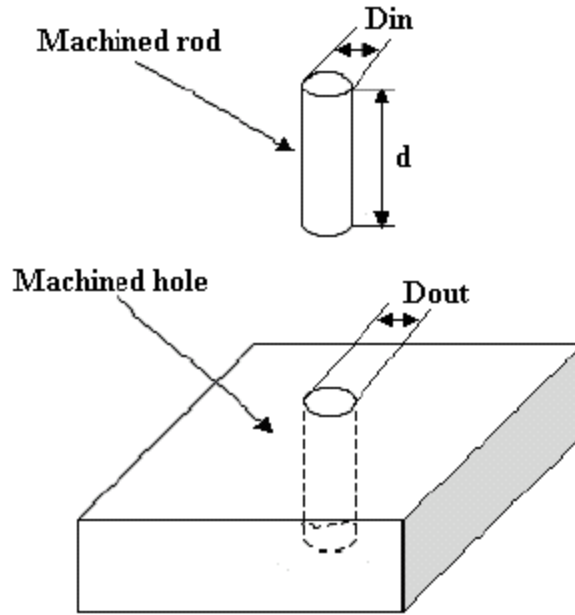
Illustration of the hole and rod machined by rotary ultrasonic machining
